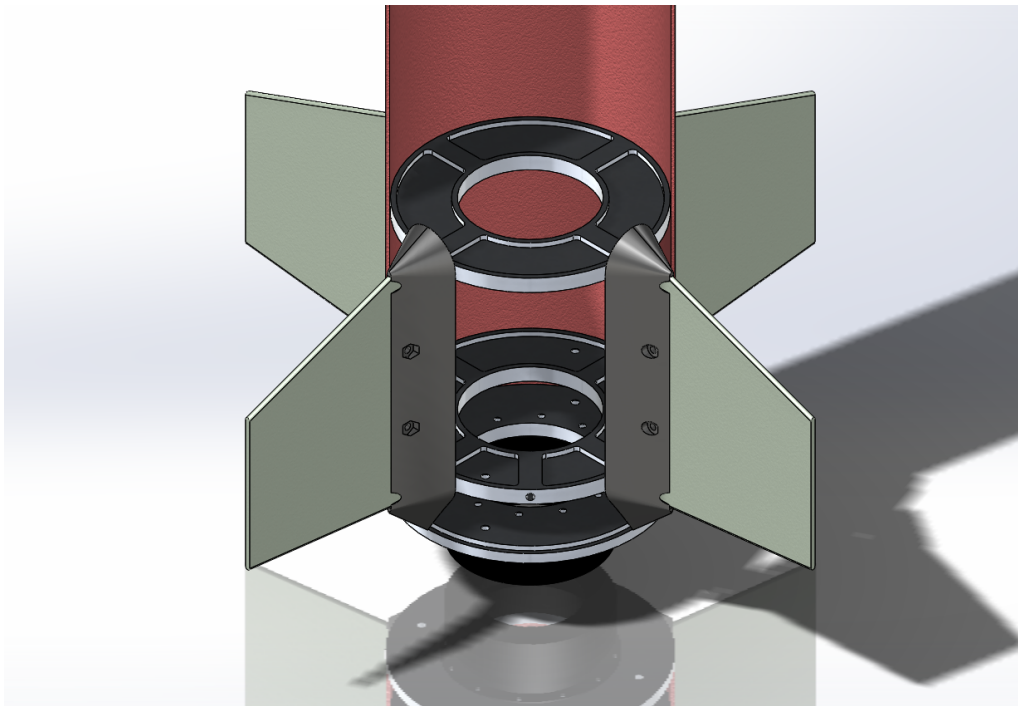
RMFS partial section view, without motor casing or fasteners.
